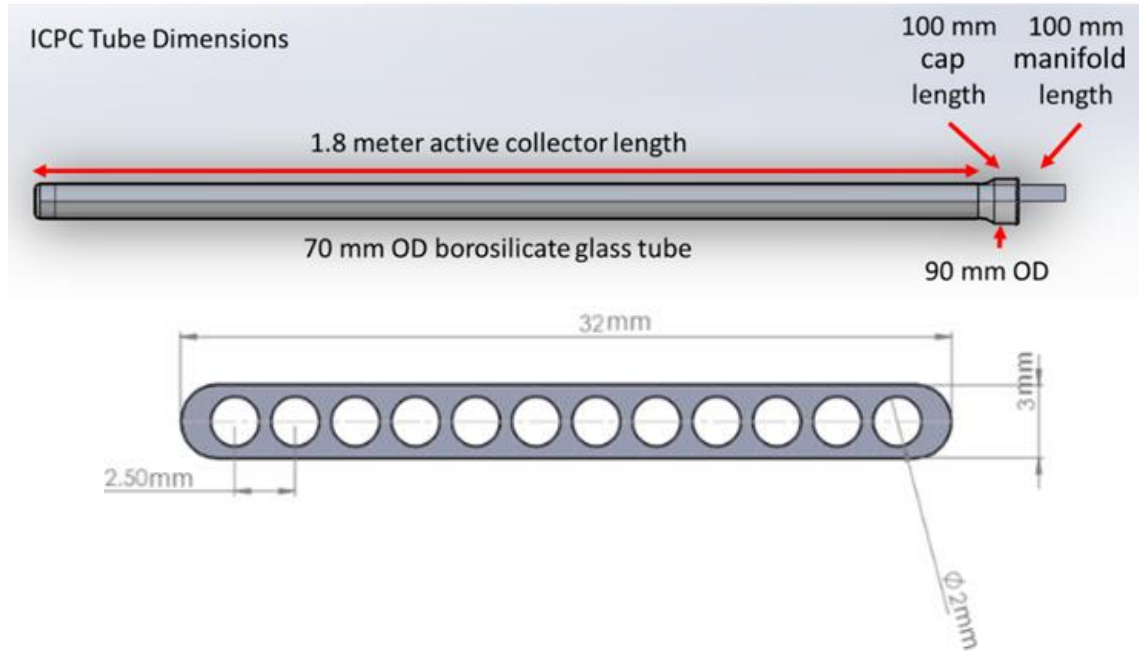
ICPC dimensions of components, including glass tube and minichannel absorber dimensions
